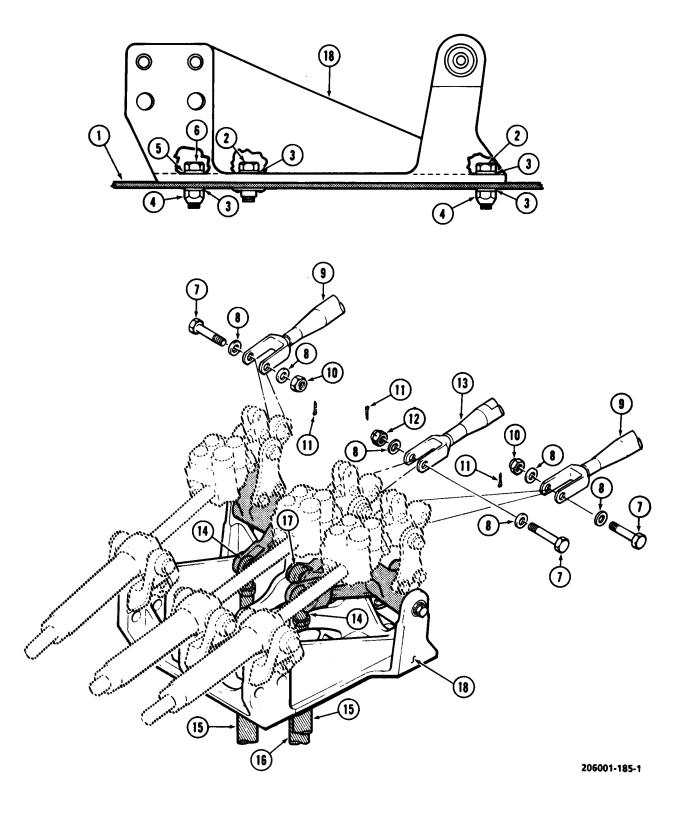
Servoactuator Support Assembly Installation (Sheet 1 of 2)
